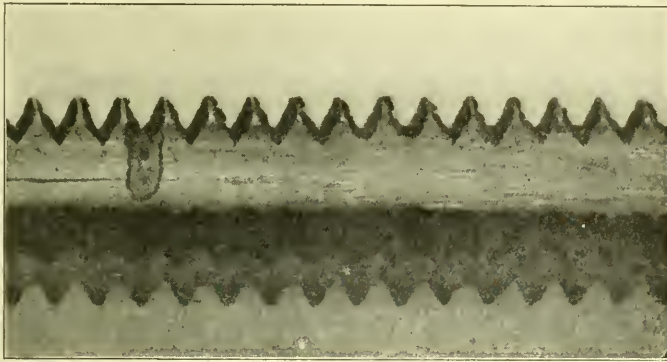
BURRS THROWN UP ON CUTTING EDGES OF TAP, CAUSING CHATTERING OF NUT
